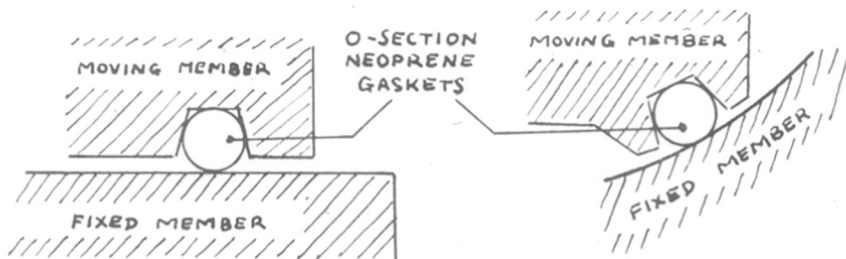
SLIDING VACUUM JOINTS AS USED IN
